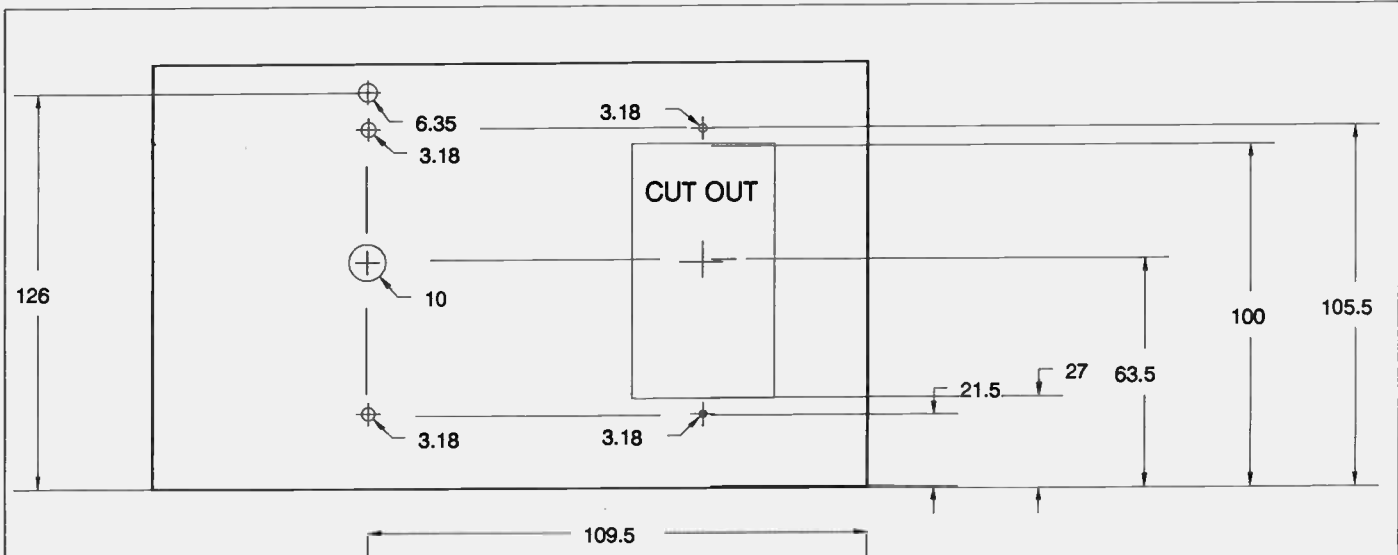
Details of the box layout for the Soldering Iron Temperature Controller. Note: all dimensions are in millimetres.
